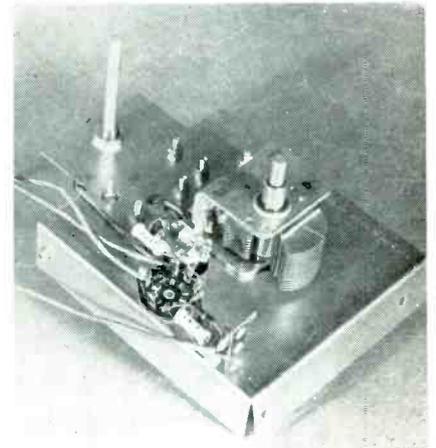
Front view of the generator subchassis before mounting on the main chassis and panel.
